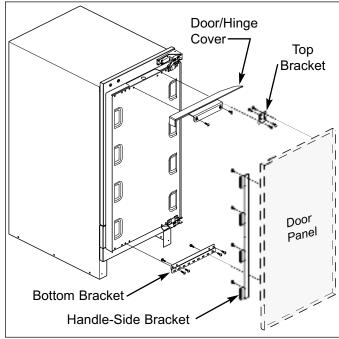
Panel Mount Hardware & Upper Door/Hinge Cover Removal
